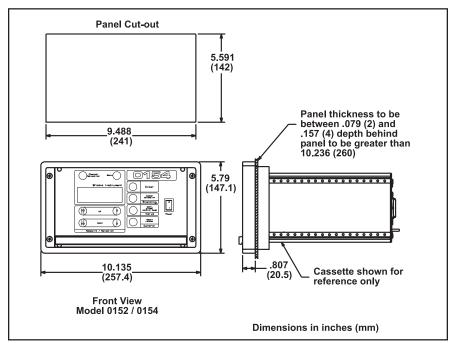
Dimensions Panel Mount Models 0152/0154
